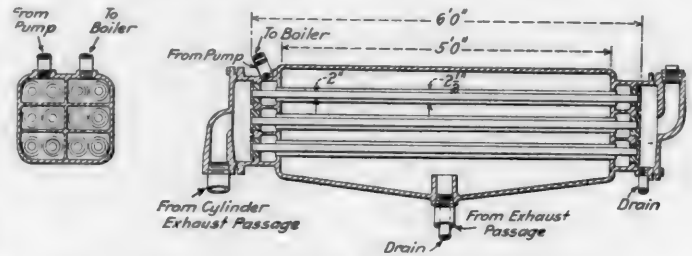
A Type of Exhaust Steam Feed Water Heater
